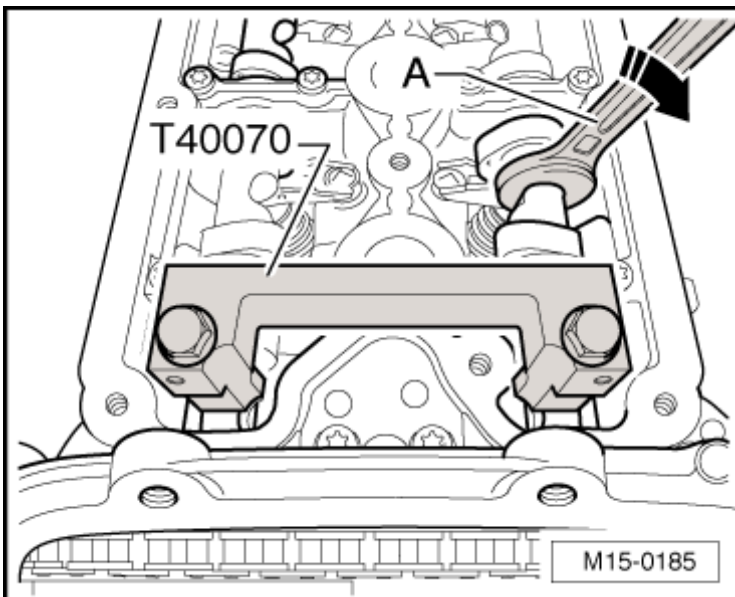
Identifying Camshaft Clamp T40070 Installed On To Camshafts
